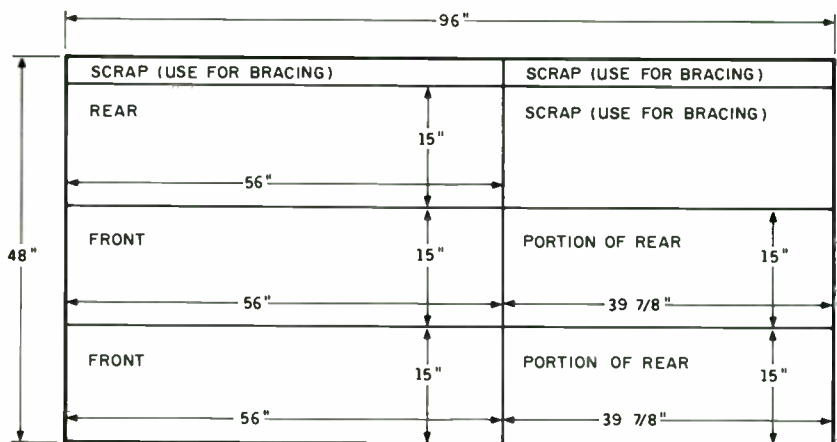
Cutting guide for 4 by 8' sheet of 3/4" high-density particle board (all dimensions in inches).
